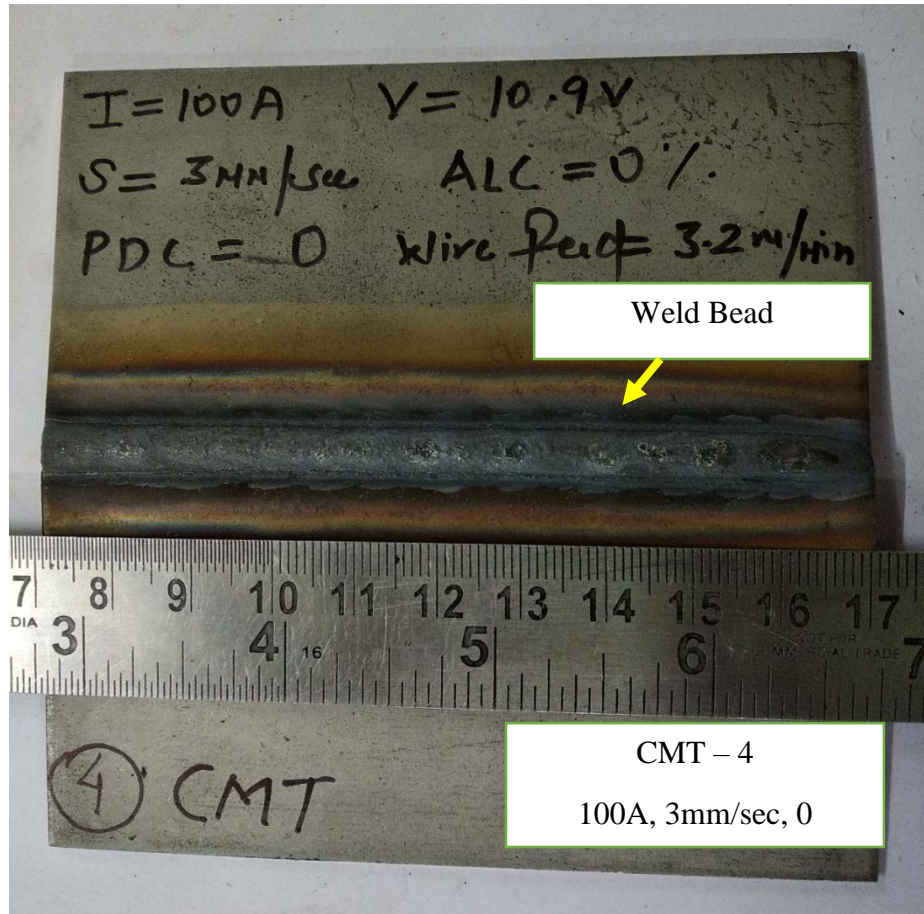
Image of CMT welded SS202 Sample 4 of thickness 1.58 mm
